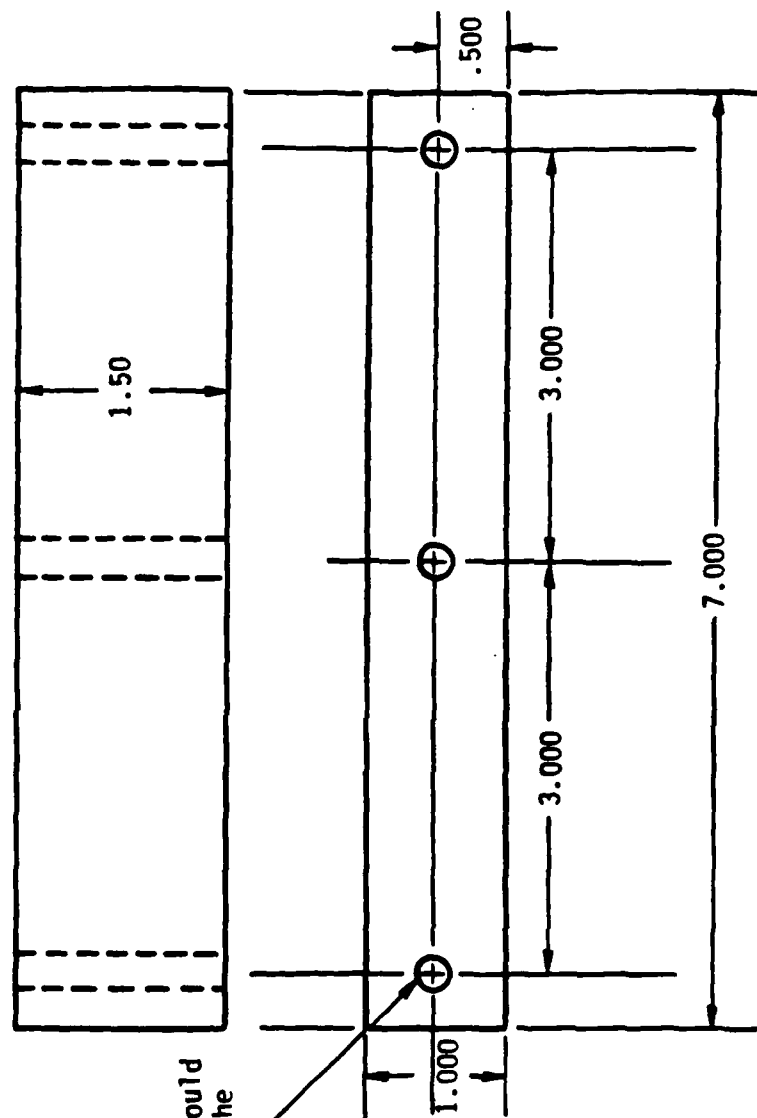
Fabrication print of the lower plate. Bolts are inserted through the three 0.248 inch diameter holes to provide 3 point alignment of the magnet with the cathode.
